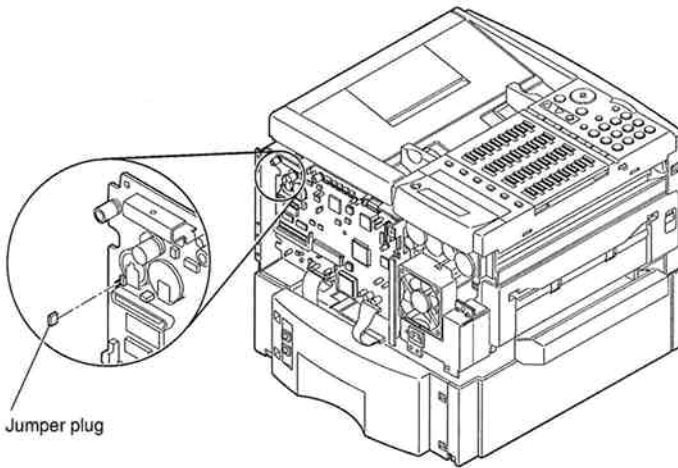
Jumper Plug (JP1) on the SCNT Board
